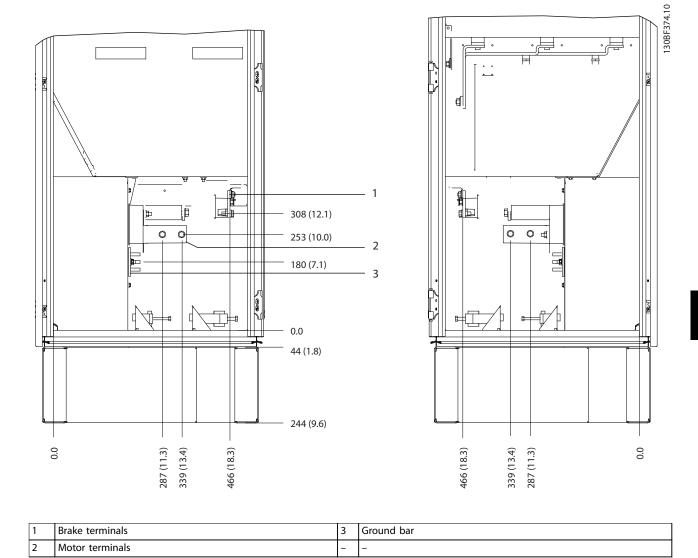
Terminal Dimensions for F1/F3 Inverter Cabinet, Side View
